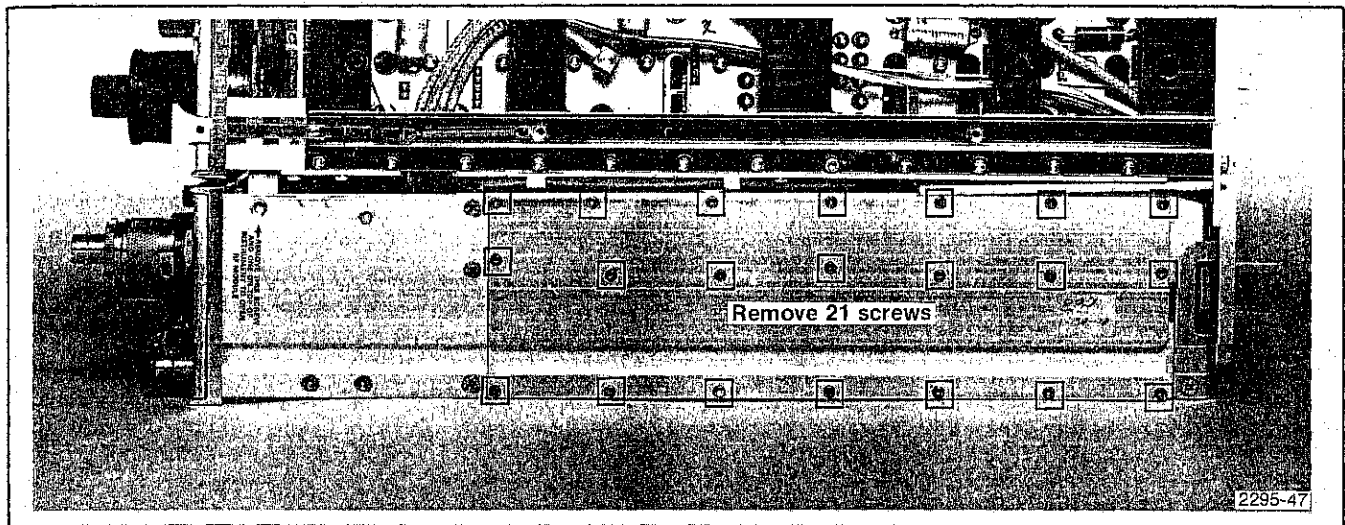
Bottom of 7L18 Showing Location of 510 MHz IF Module.
